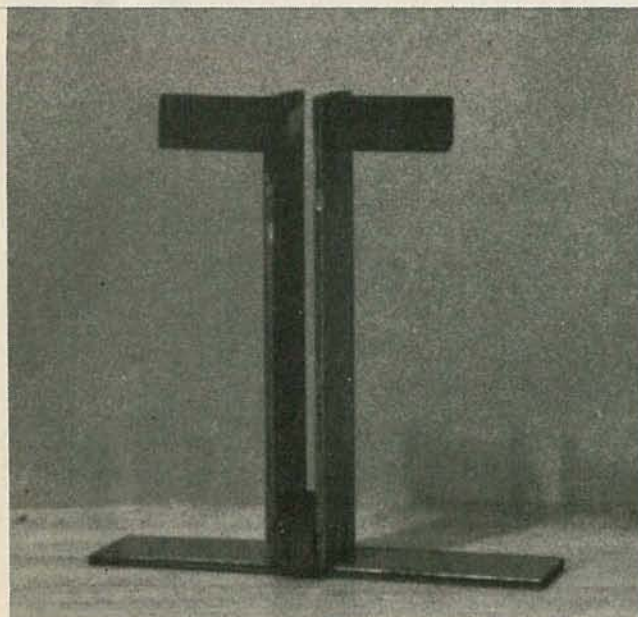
ASSEMBLING THE POLE pieces and magnets to form the MHD chamber couldn't be easier.
